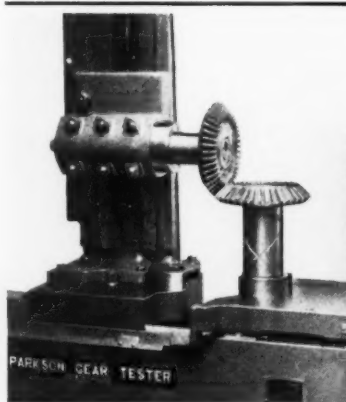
Testing Bevel Gears on Parkson Gear Tester
